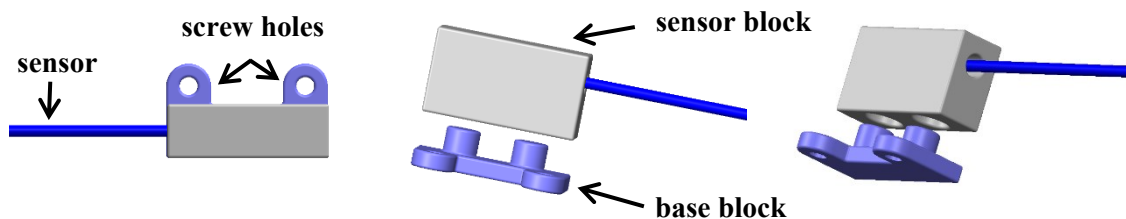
CAD model of design concept 1: two part stud-and-tube applicator.
